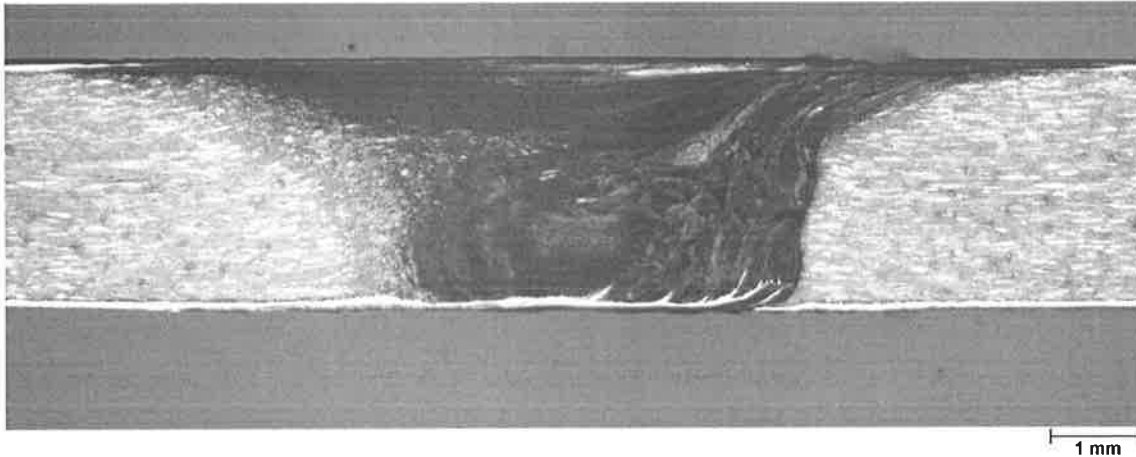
Weld macrograph of a friction stir weld produced by the author in 2.5mm thick clad 2524 T3 aluminium alloy demonstrating fine finger like projections of the lighter coloured pure aluminium cladding penetrating into the weld nugget.
